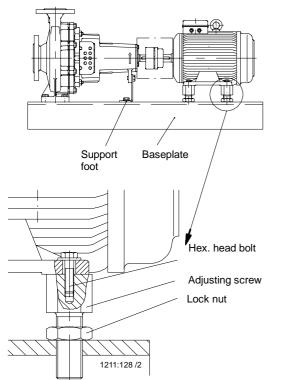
Motor with adjusting screws Motors without adjusting screws
